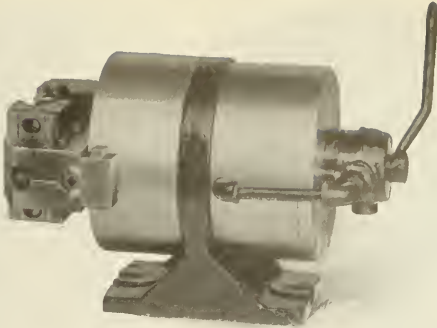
Detroit Pneumatically Operated Milling Fixture for Carburetor Bodies
